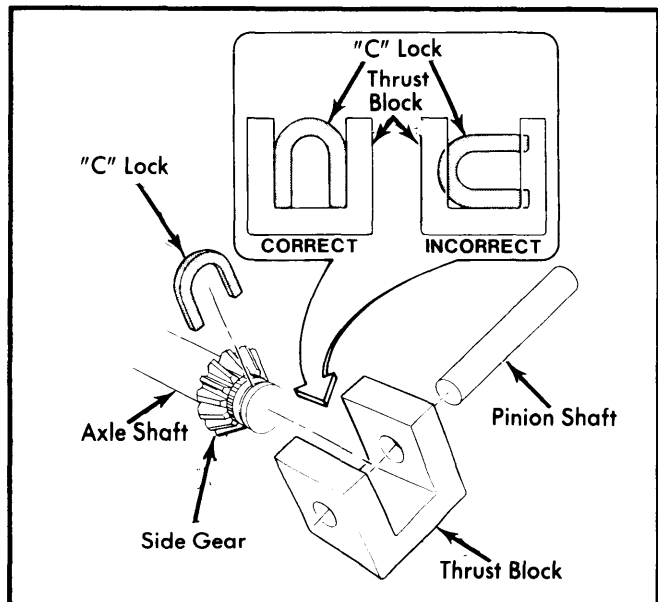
View Showing Correct Positioning of "C" Lock for Removal
